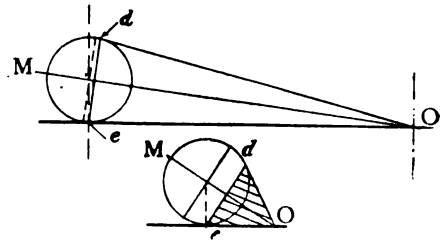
SHOWING DEVELOPMENT OF THRUST BEARING FROM CONE.
